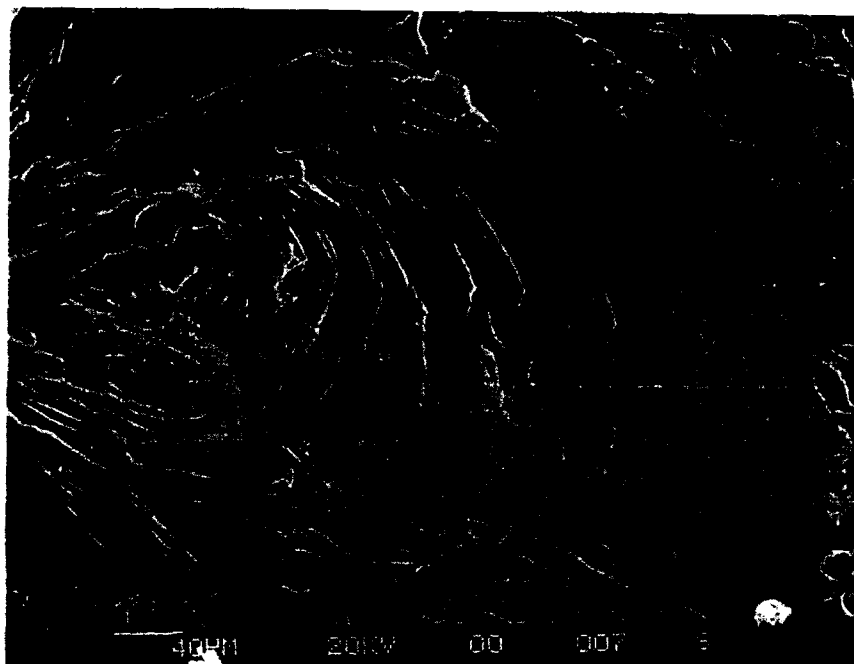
Fracture surface of the open hole fatigue specimen of new 7050 alloy with several cracks and cleavage planes.
